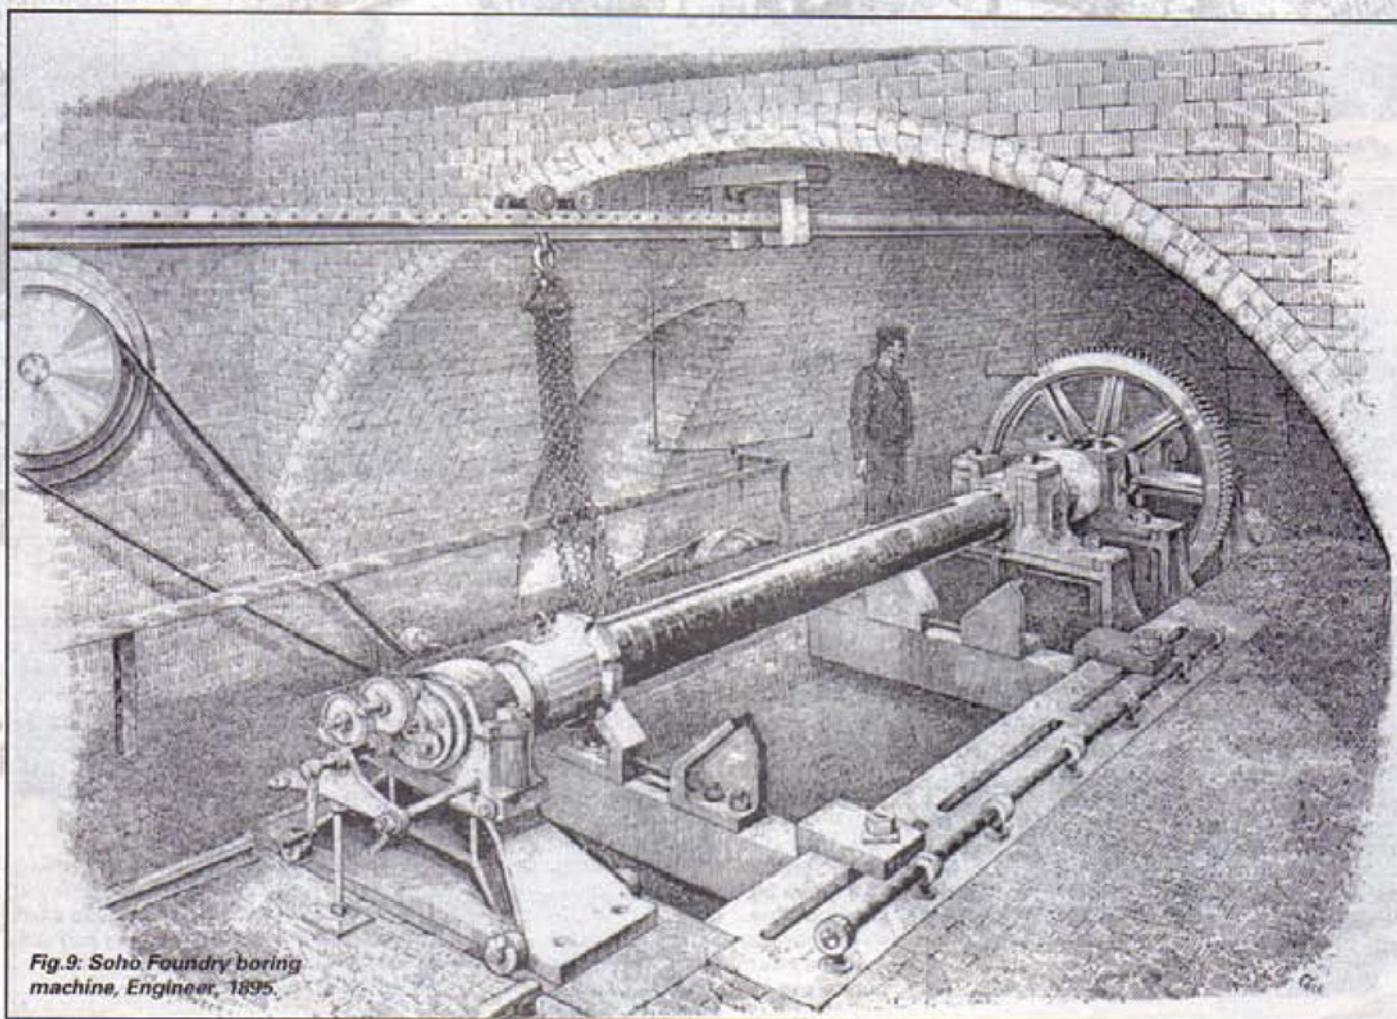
Soho Foundry boring machine, *Engineer*, 1895.
